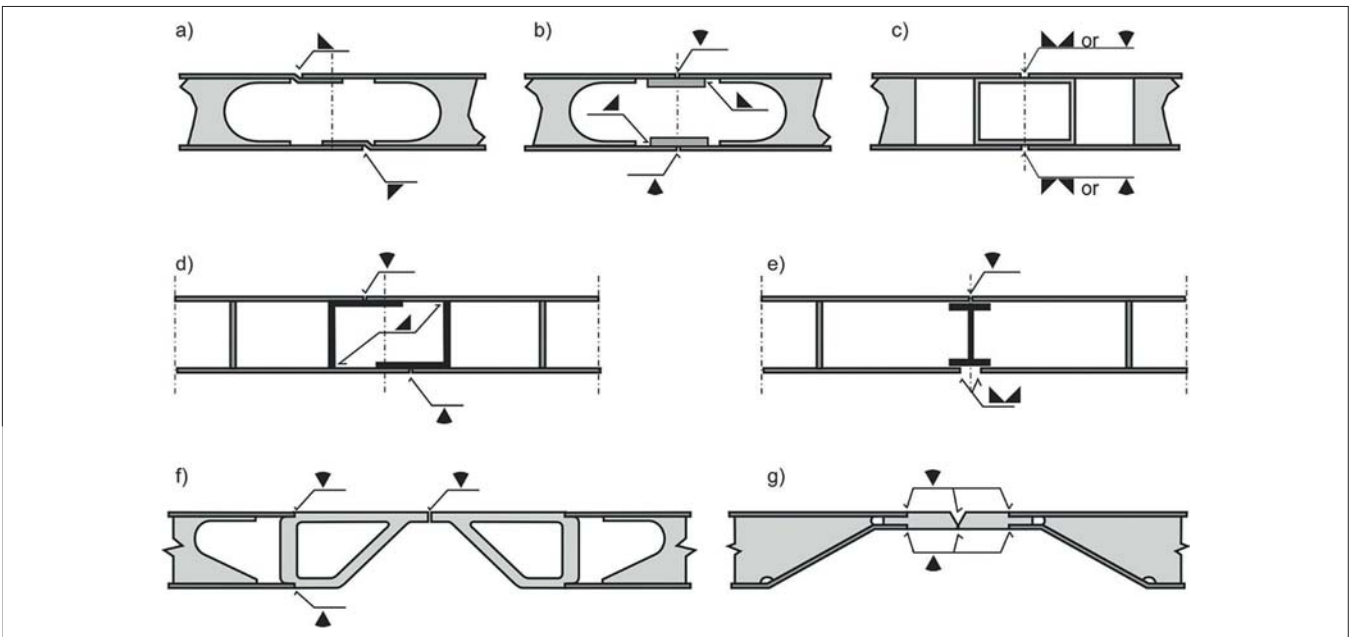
Examples of butt welded panel-panel joints: a) without additional parts; b) by flat bar; c) by square tube; d), e) by rolled profile; f), g) with reduction of thickness
